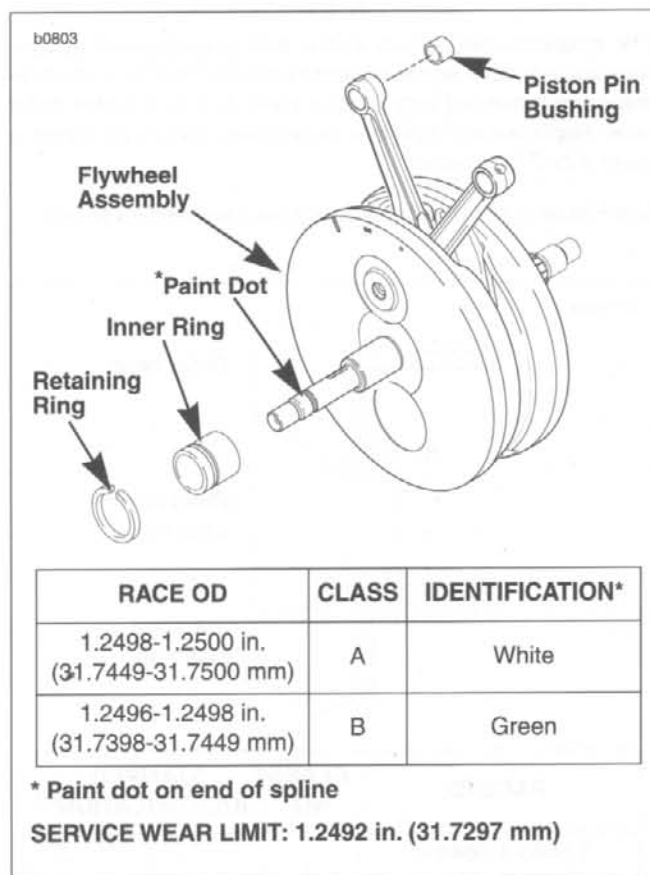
Low Inertia Flywheel and Connecting Rod Assembly/Factory Inner Race Sizes
